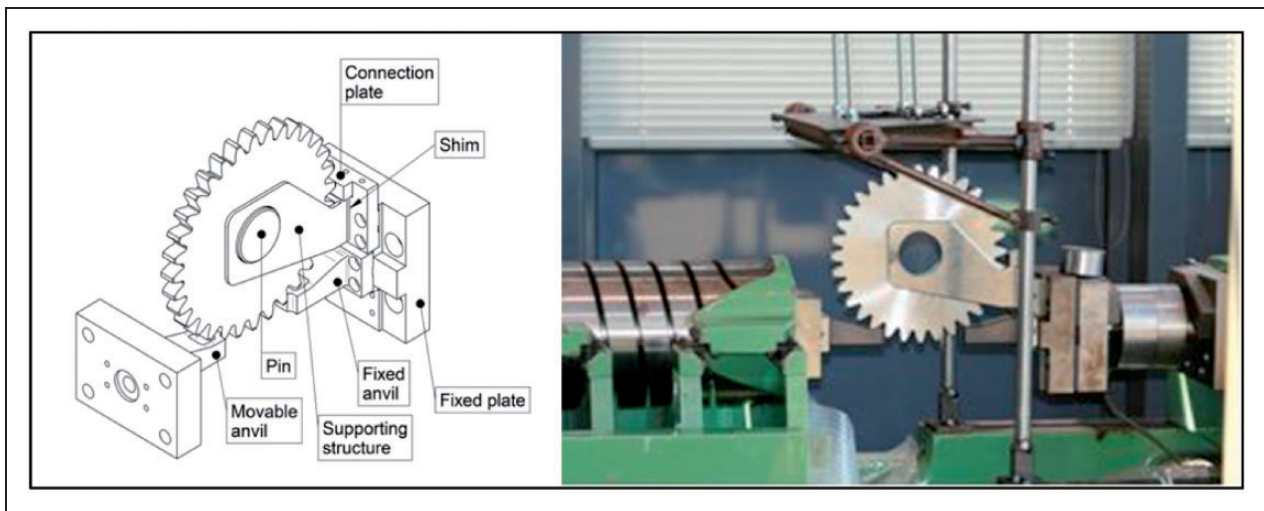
Bending fatigue test apparatus: on the left a 3D schema and part nomenclature; on the right gear mounted on the test rig.
